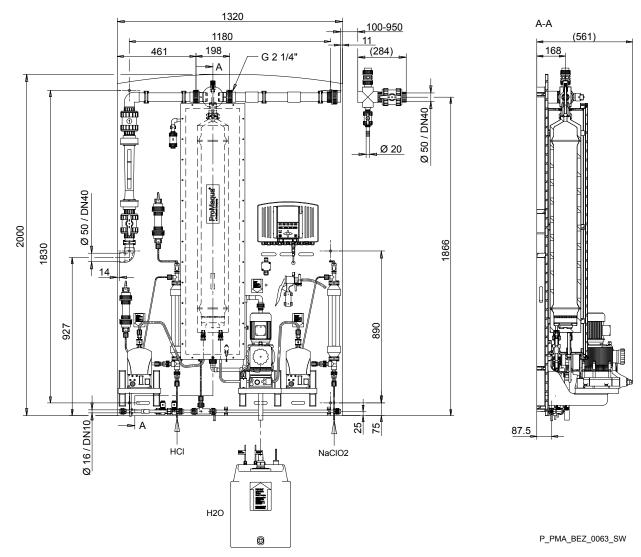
Dimension sheet CDKc 2100 ... 3000, fully equipped version - dimensions in mm
